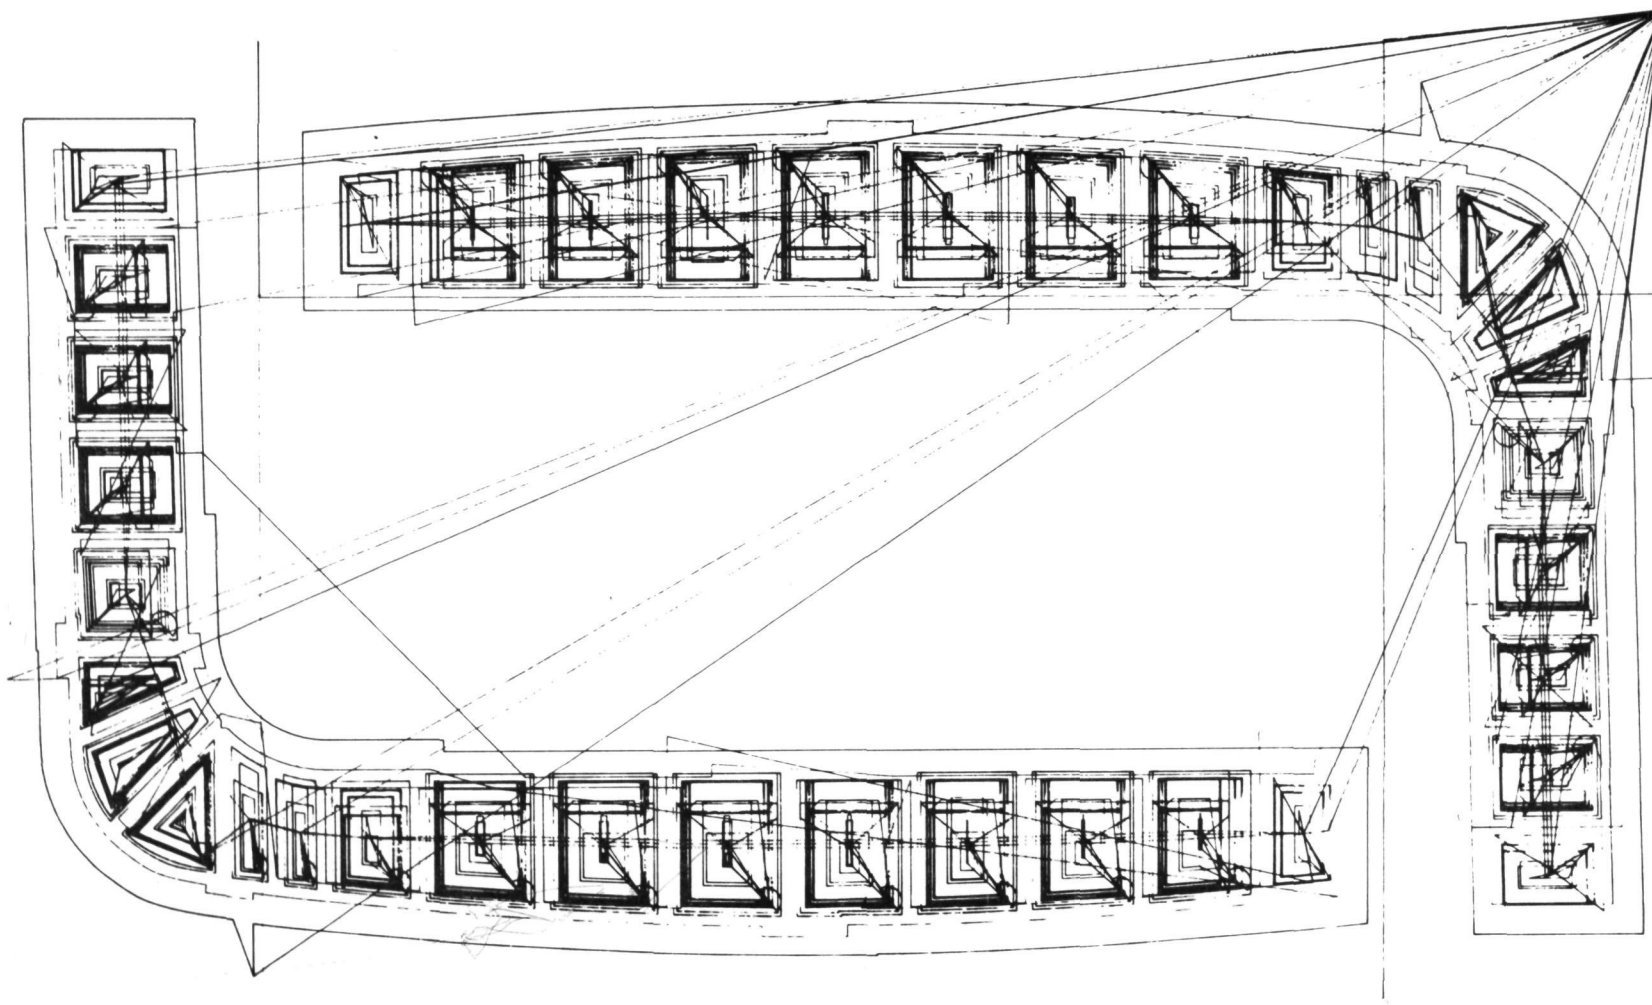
Concorde intake frame: production plan the machine layout and cutter path.
